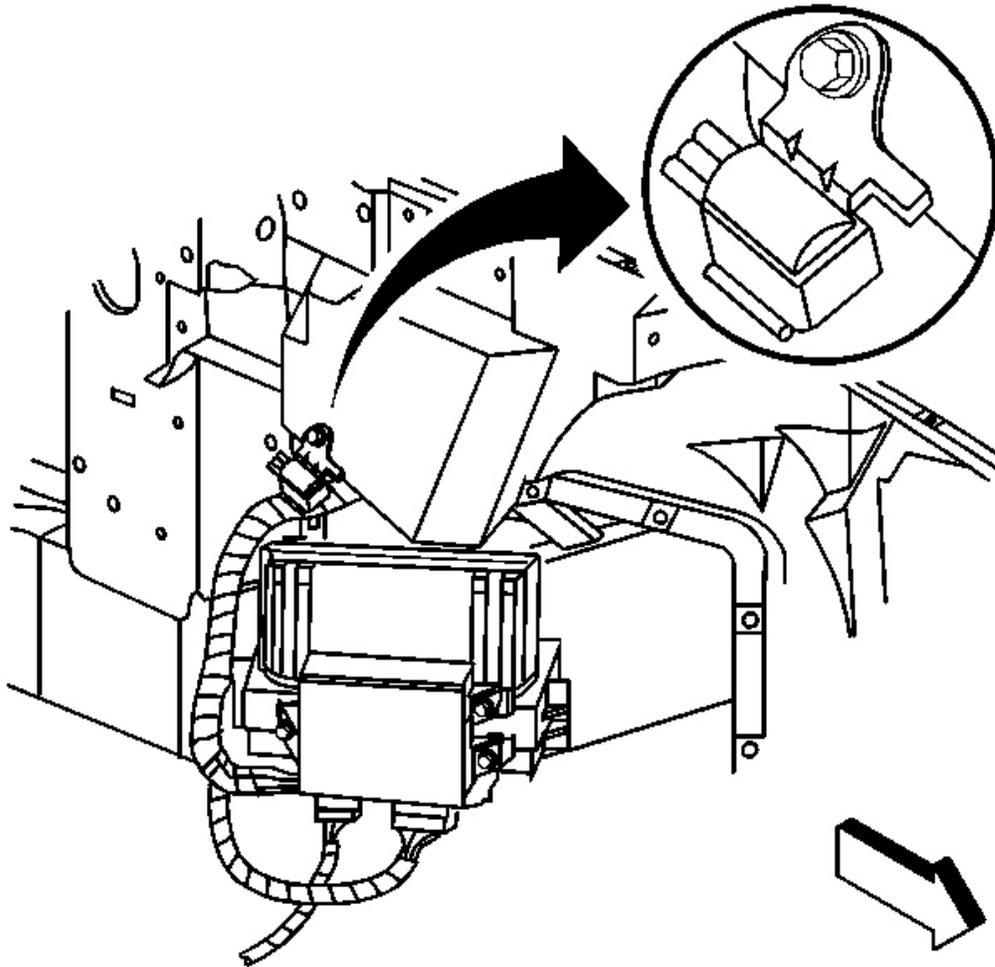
AIR Solenoid Valve & Retaining Nut
